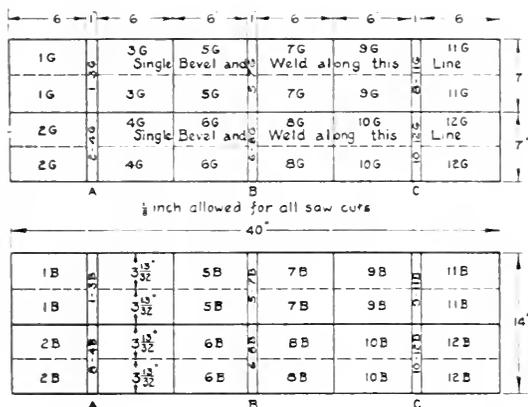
Two Similar Examples of the Layout of Test Plates preparatory to cutting
